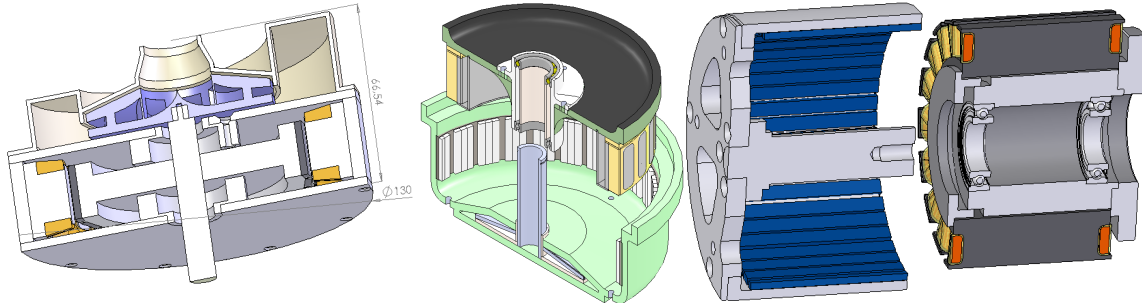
CAD drawings of the radial flux machines that take advantage of distributed concentrated windings
